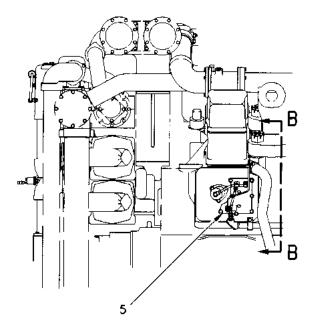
Engine Mounted Sensors Left Side View (5) Combustion buffer.
